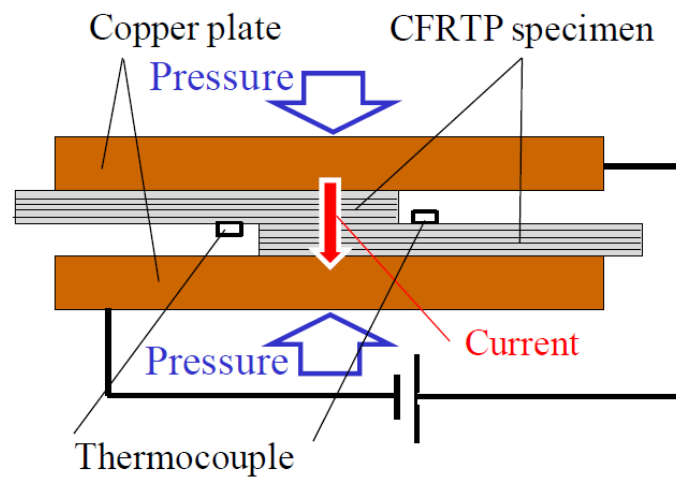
The schematic illustration of surface welding using proposed method<sup>88)</sup>
